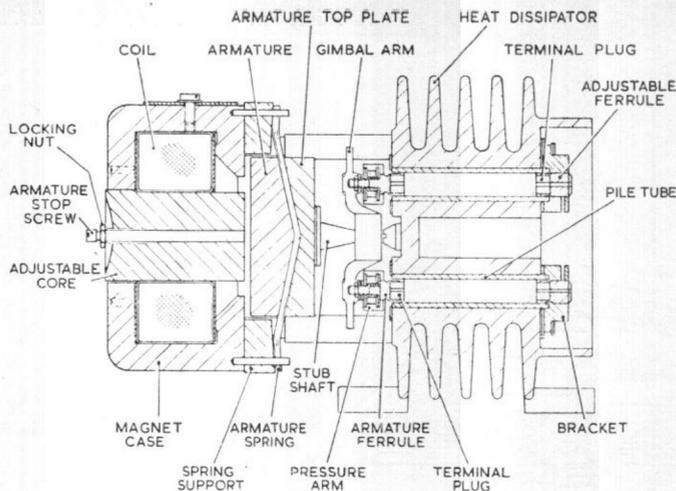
Sectional view of multi-pile regulator with flat type armature spring
